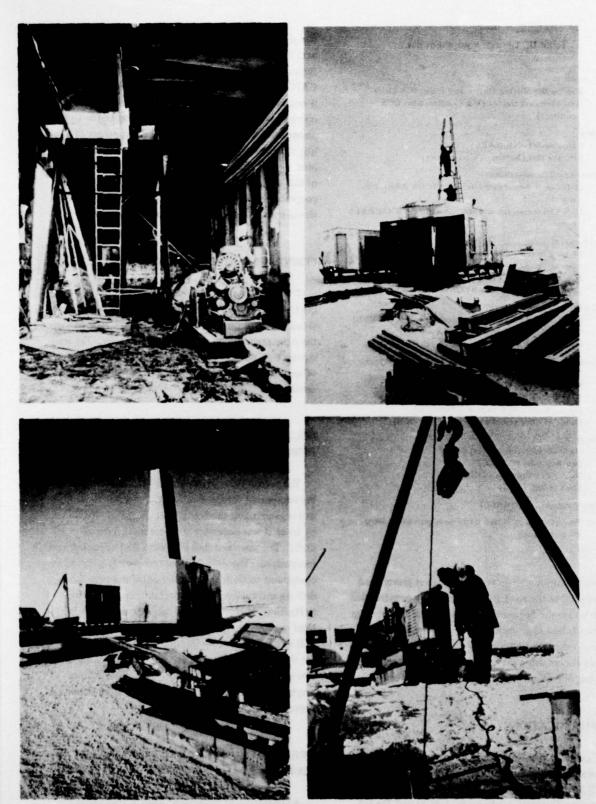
Drill sled being modified with new tower and drilling unit. In lower right the new Acker unit is being loaded on the Bombardier trailer for transfer onto the drill sled.
